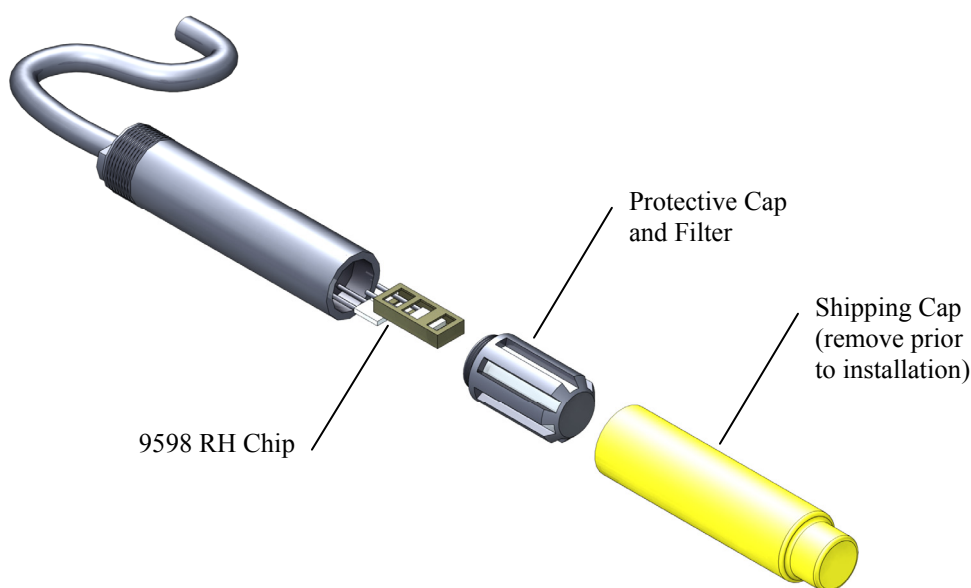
Exploded view of HMP60 (as shipped)
